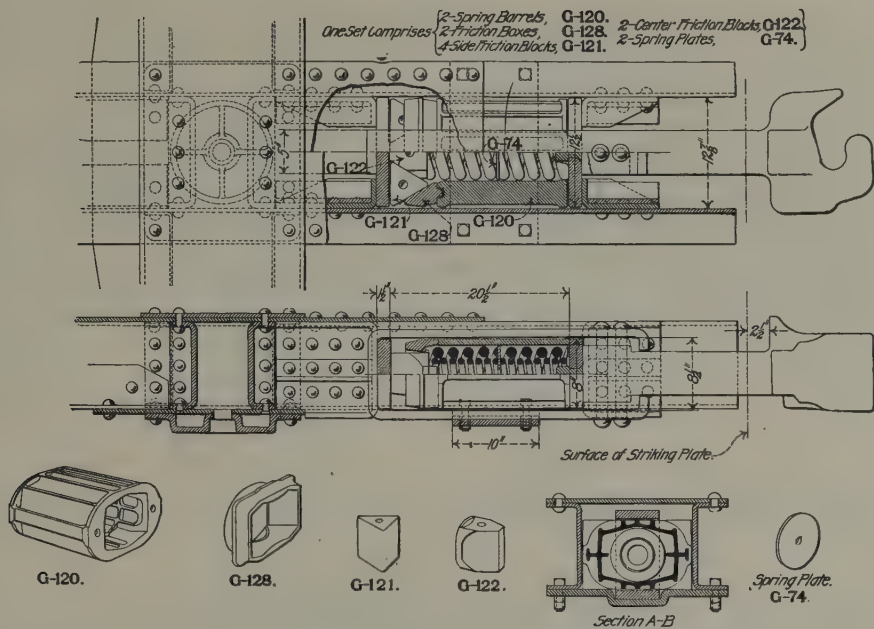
Sessions-Standard Friction Draft Gear, Type H, for Freight Cars with Pressed Steel Underframes. Standard Coupler Company.
